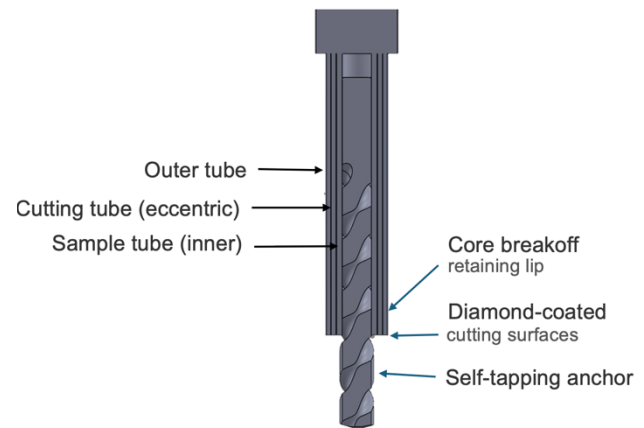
HERMES triple-tube coring drill assembly showing outer tube, eccentric cutting tube, and inner sample tube.
